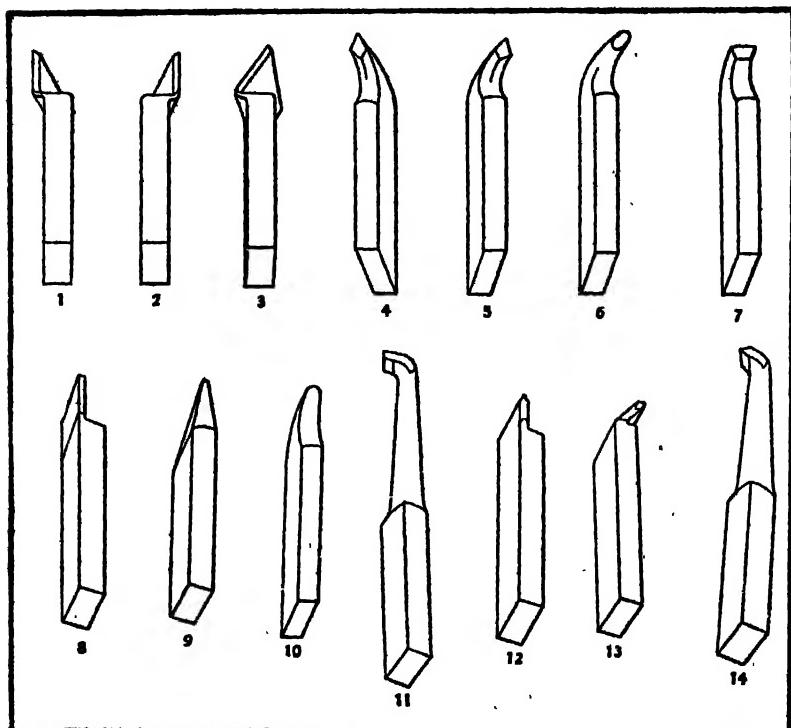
Set of Ordinary Hand Forged Cutting Tools for Use in Lathes.
